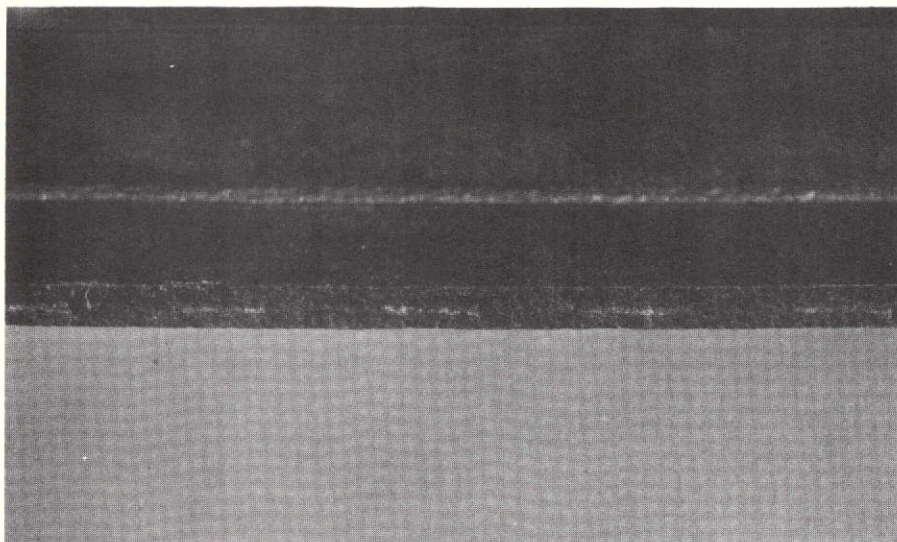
Type A Positive Plate - Coined and Die-Cut Edge
